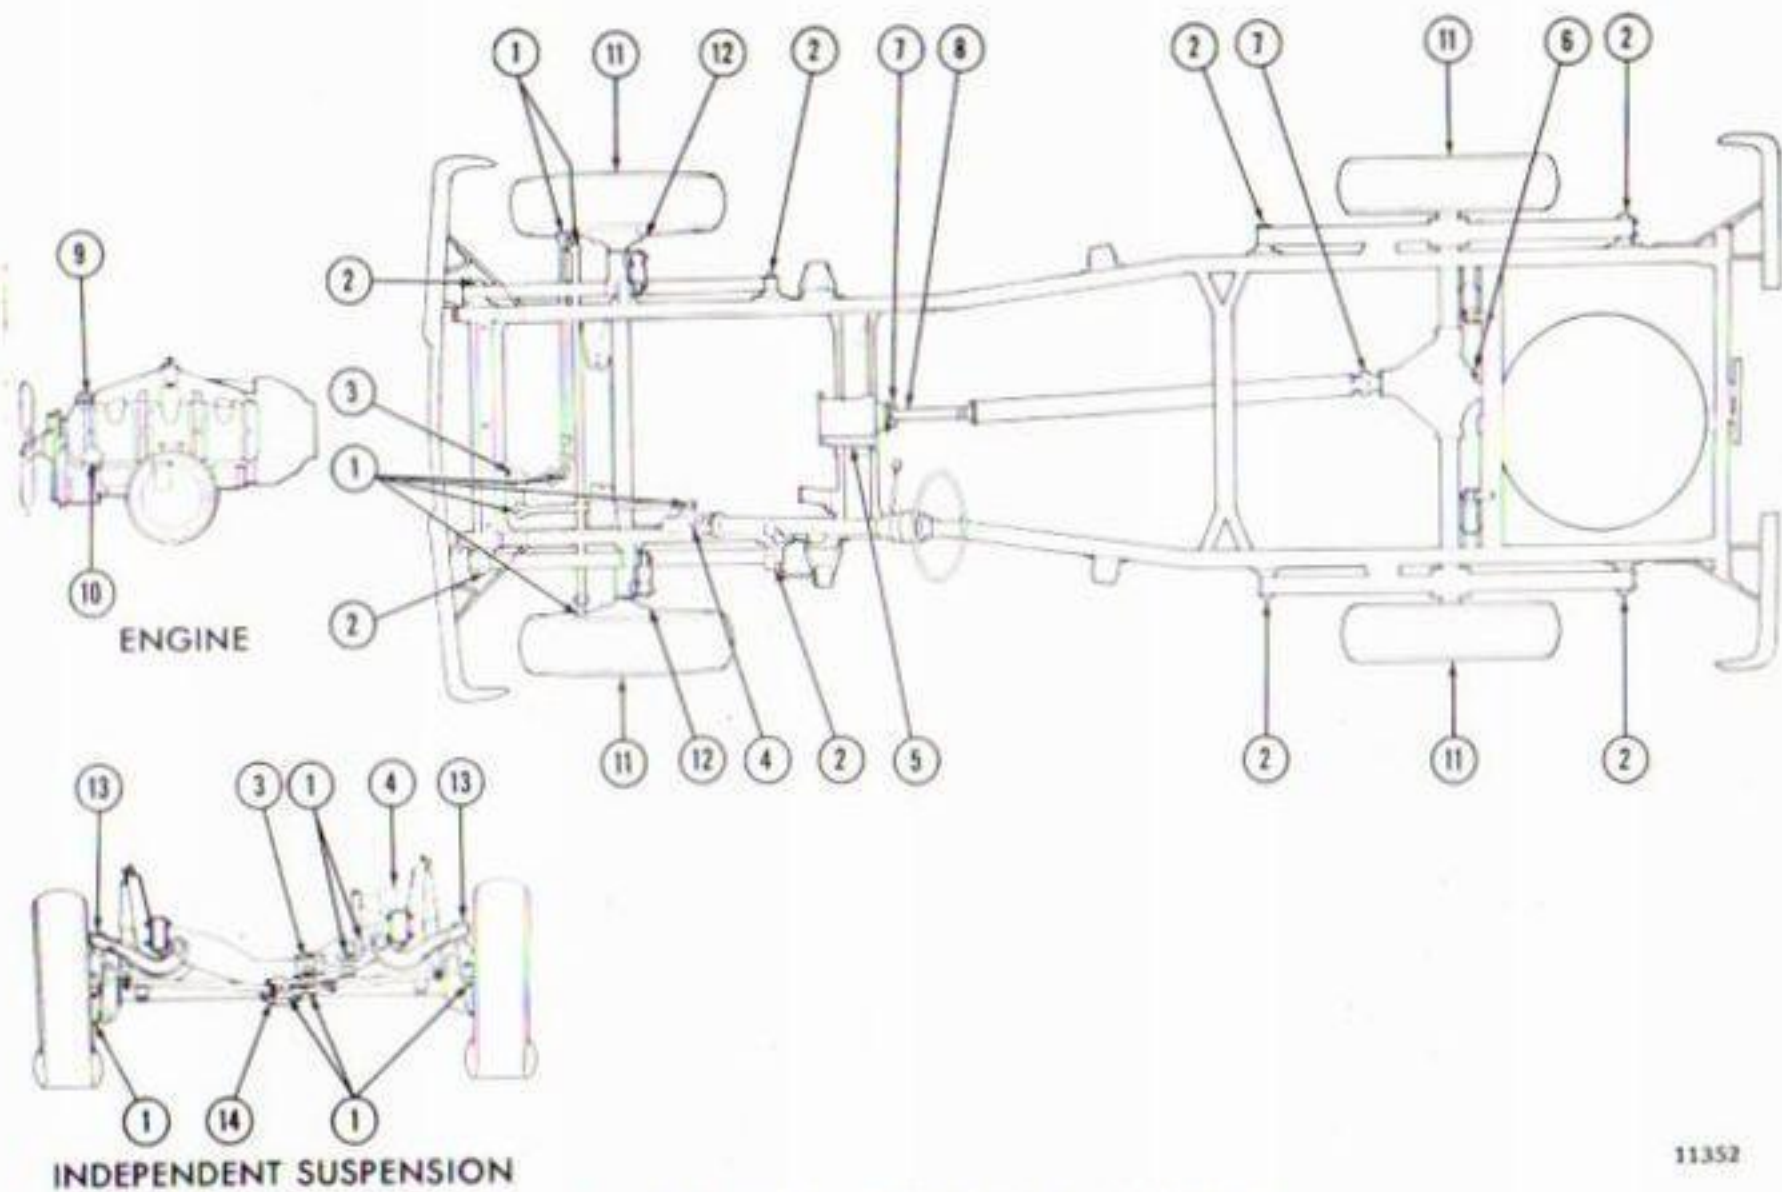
LUBRICATION CHART—2-WHEEL DRIVE
